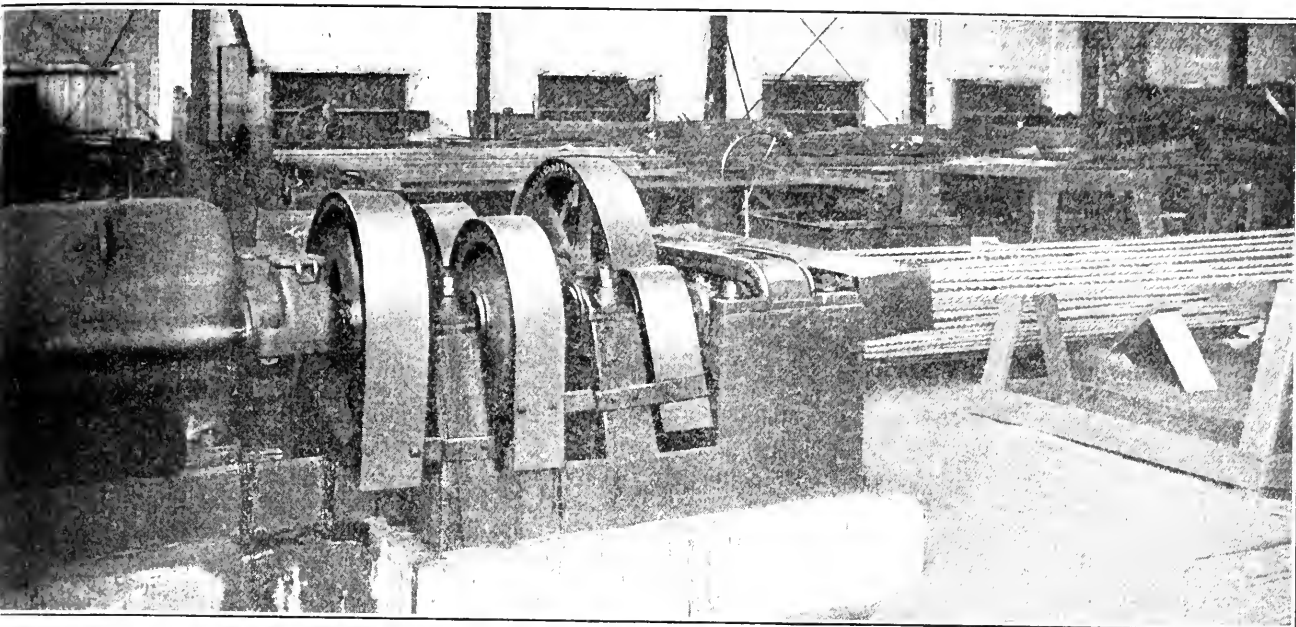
FLYWHEEL MOTOR-GENERATOR SET SUPPLYING POWER TO REVERSING MILL
